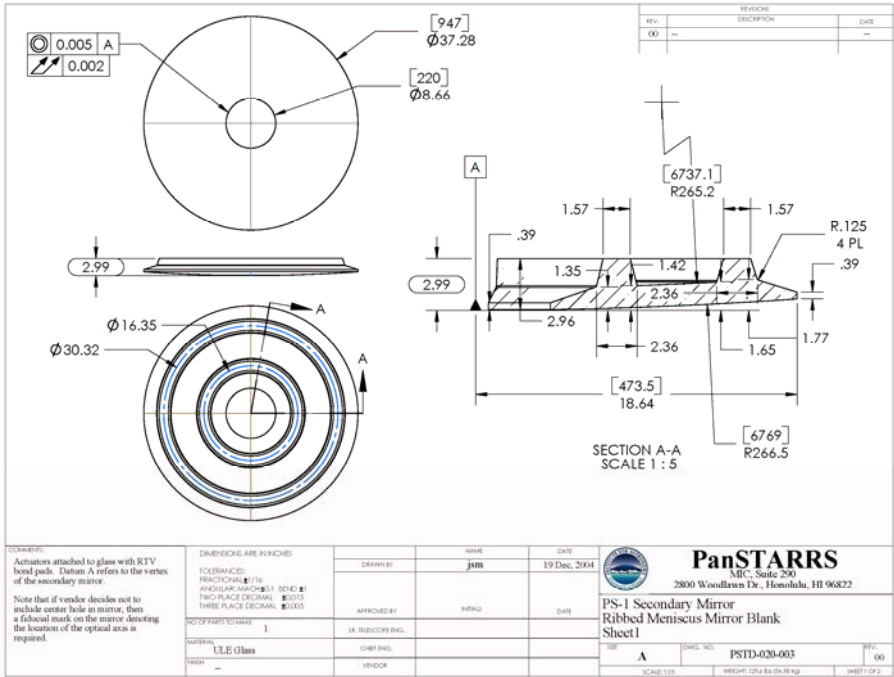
The PS-1 Secondary Mirror Blank Dimensions
